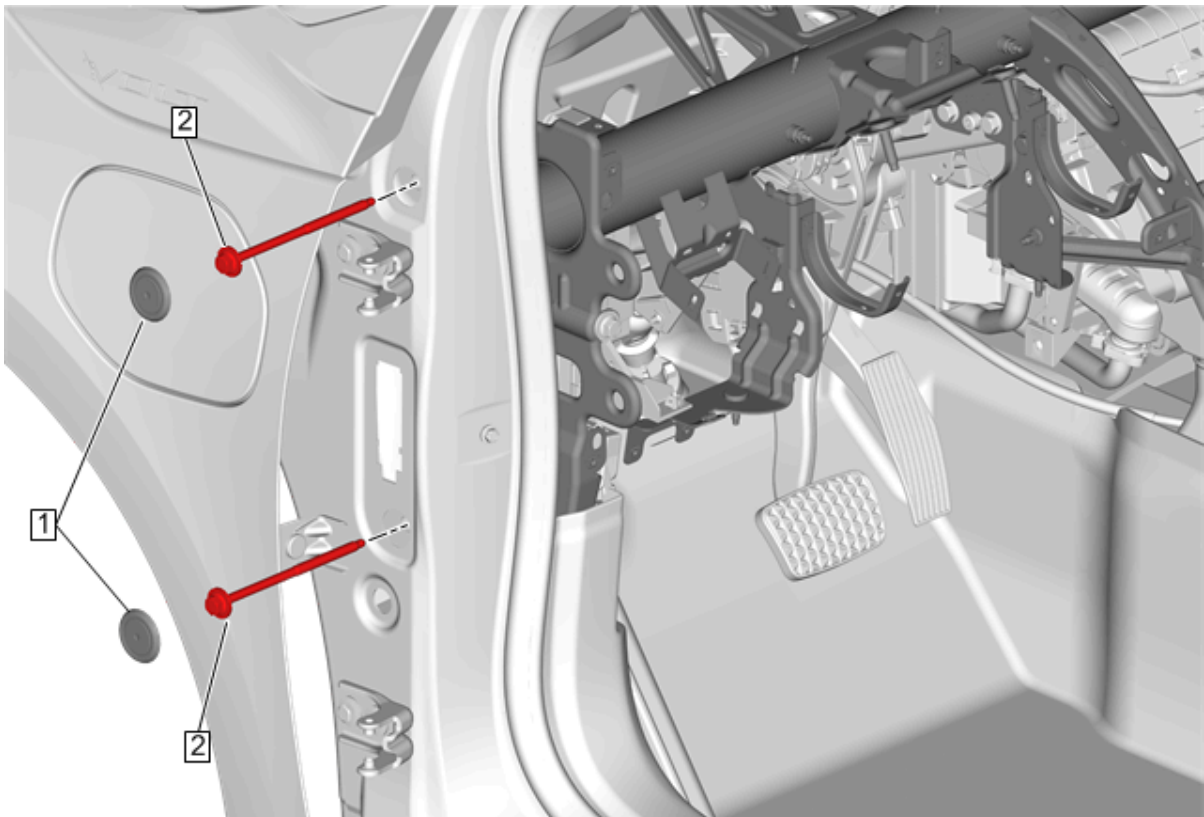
Body Hinge Pillar Outer Panel Hole Plug And Bolt
